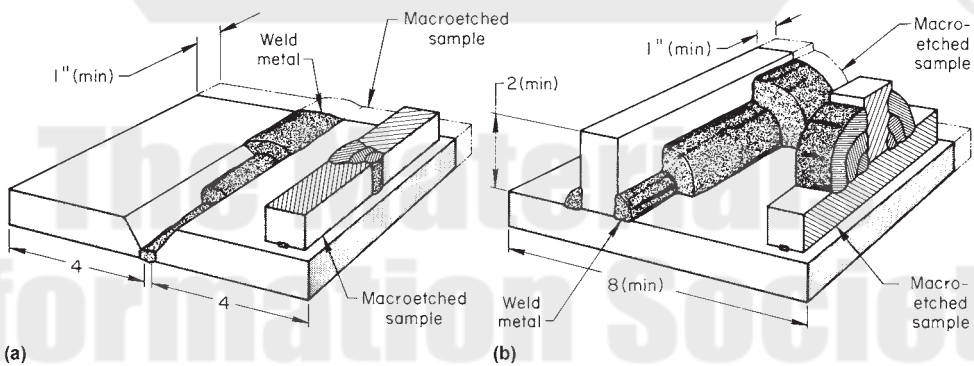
Workmanship standard for visual comparison during inspection of (a) single V-groove welds and (b) fillet welds. Dimensions given in inches. Source: Ref 1
